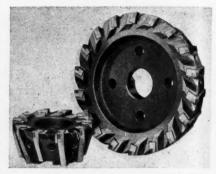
Kearney & Trecker Full-Back Blade Milling Cutter designed for use with Tung-sten Carbide.
